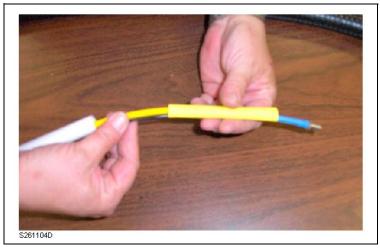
Slipping on a piece of heat-shrinkable tubing
